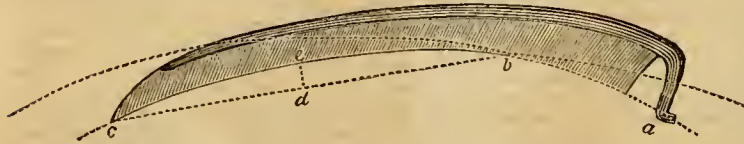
PROPER FORM OF CRADLE SCYTHE.
